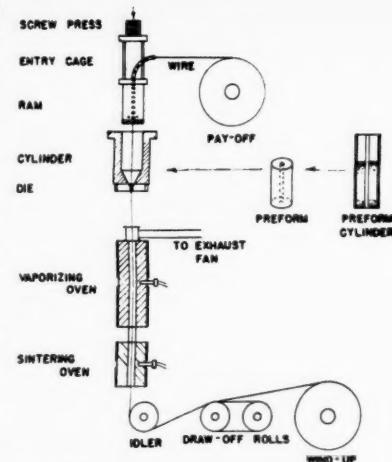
Diagrammatic View of Wire Coating with Lubricated Teflon Extrusion Powder
